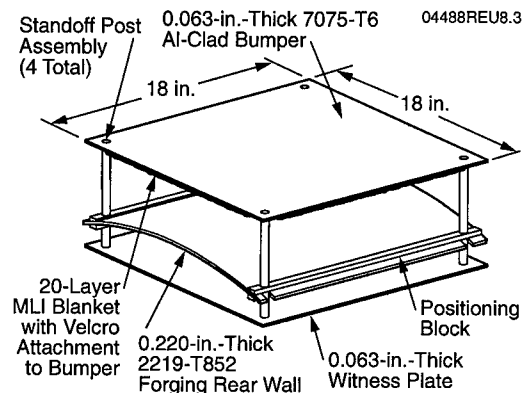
Phase II test specimen (minimum rear wall configuration).
